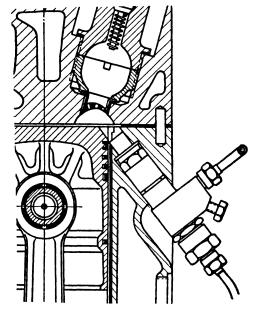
Kreutzer M.W.M. Air Chamber Design.
